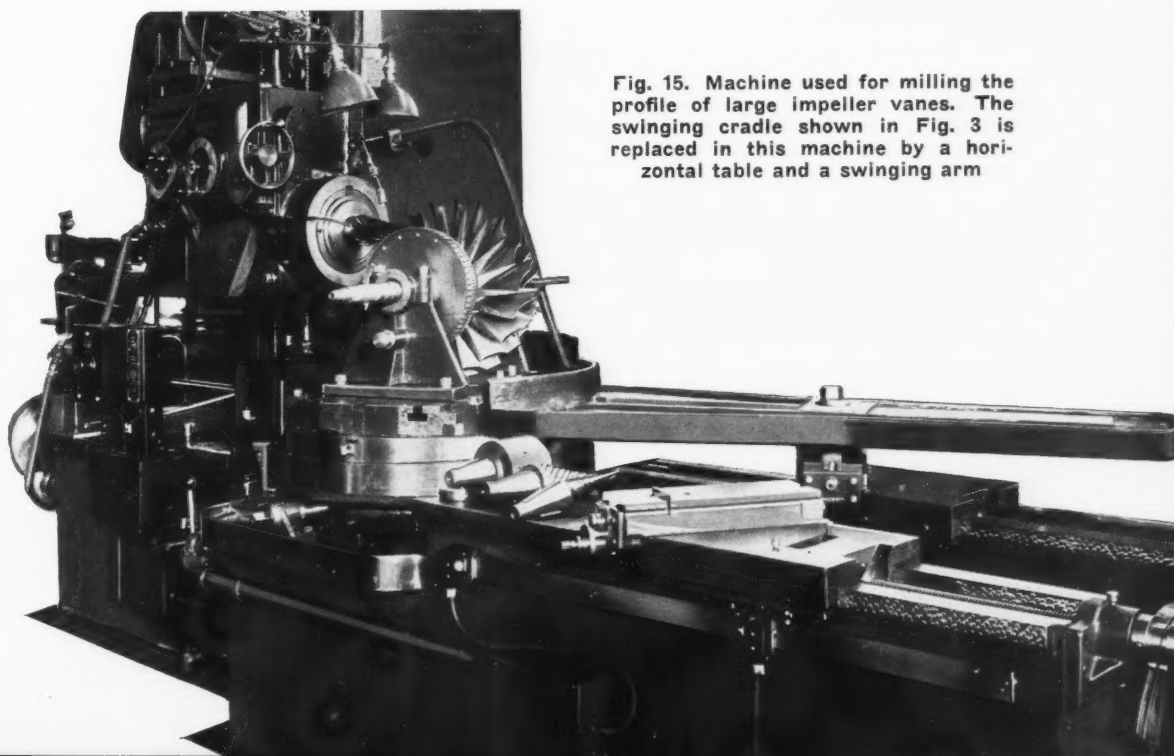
Machine used for milling the profile of large impeller vanes. The swinging cradle shown in Fig. 3 is replaced in this machine by a horizontal table and a swinging arm
